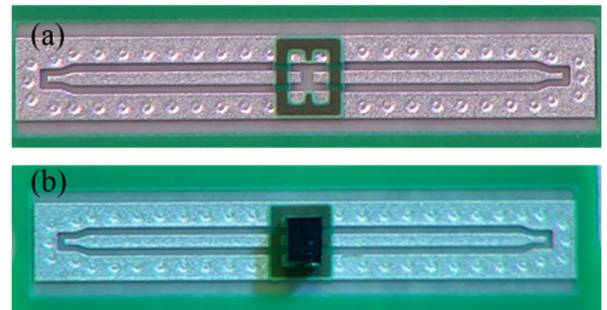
(a) The coplanar waveguide on the PCB with contact pads for MMIC. A frame around pads is a soldering mask preventing the solder from flowing along copper tracks. (b) The test structure with the MMIC dummy chip attached.
